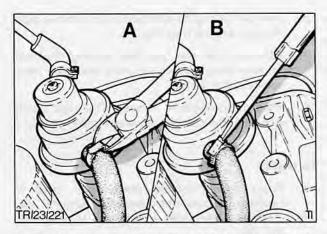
Disconnecting and reconnecting fuel pump outlet hose
